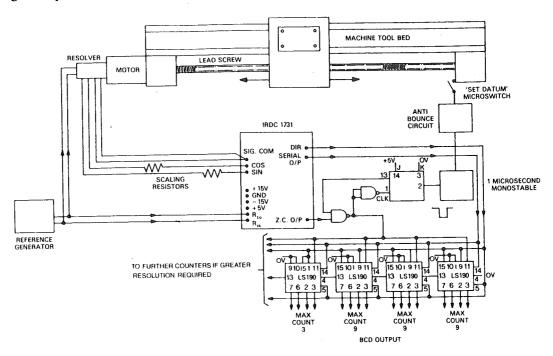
Using the IRDC 1731 with a resolver on a machine tool axis system.
